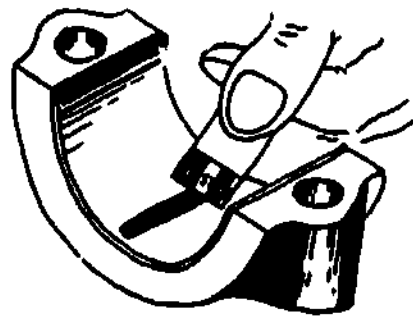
Measuring crankshaft bearing running clearance (using plastigage).
